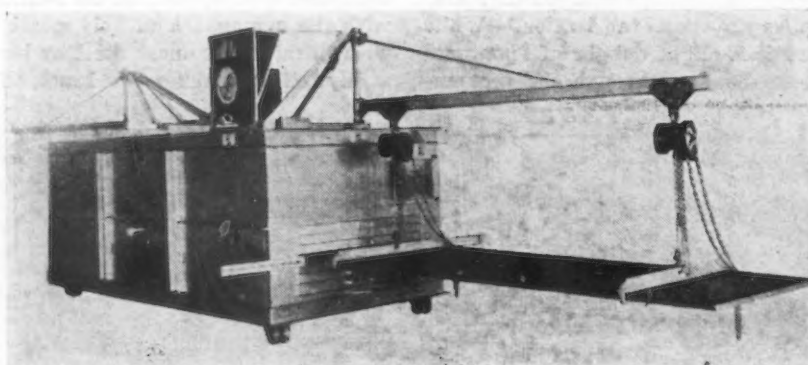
Knapp-Lee electrical heating and annealing furnace for flat sheets.
